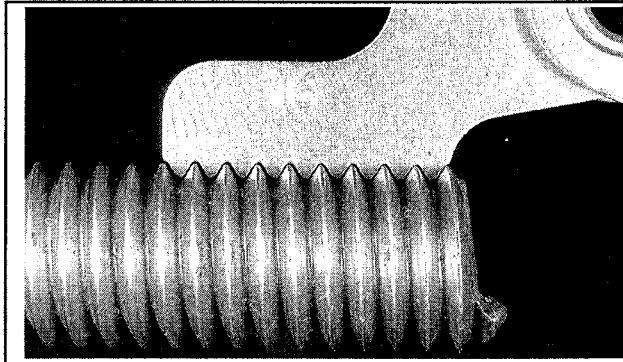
Thread gauges measure the threads-per-inch and the pitch of a bolt or stud's threads
